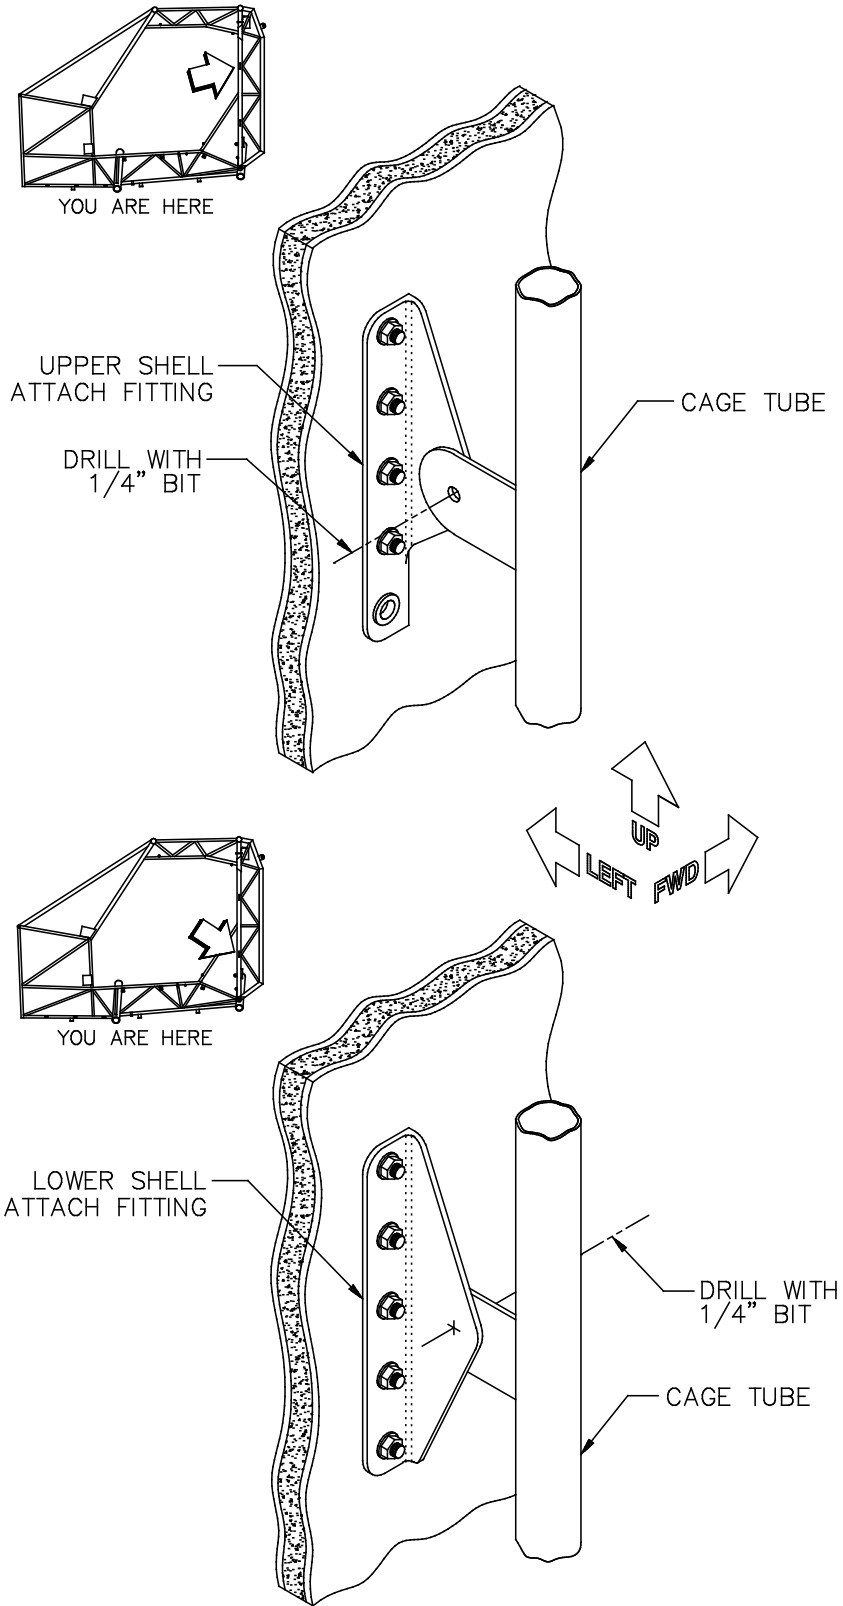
Drilling the Final Holes in the Shell Attach Fittings
